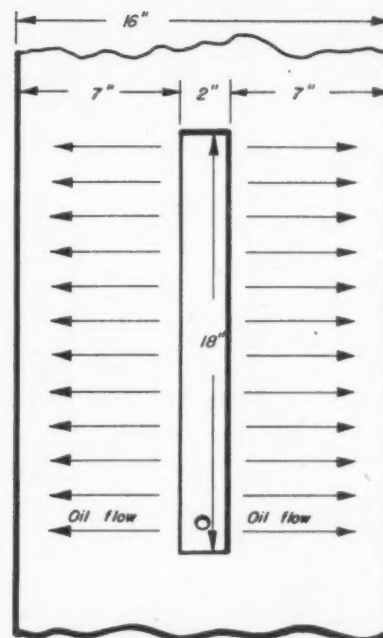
Above—Developed view of oil lift groove in ball-mill bearing
